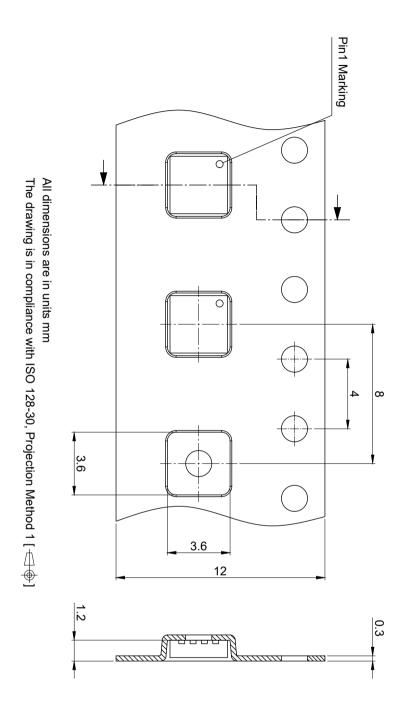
Packaging variant PG-WHTFN-9, dimensions in mm
